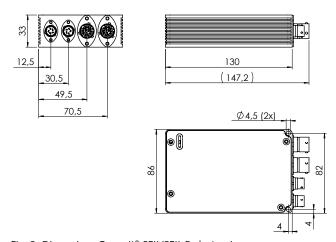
Dimensions Correvit® SFII/SFII-P electronics
